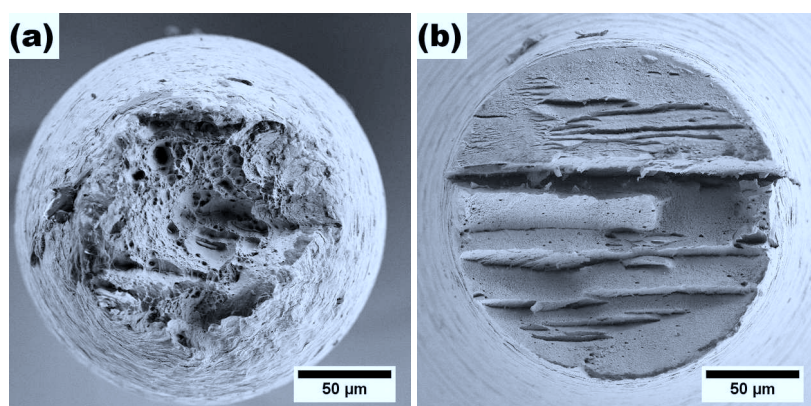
Exemplary fracture surfaces of (a) as-quenched and (b) HPT-treated martensite after tensile tests (1 turn, $r = 1.5$ mm, $\varepsilon_{VM} = 7.5$).
